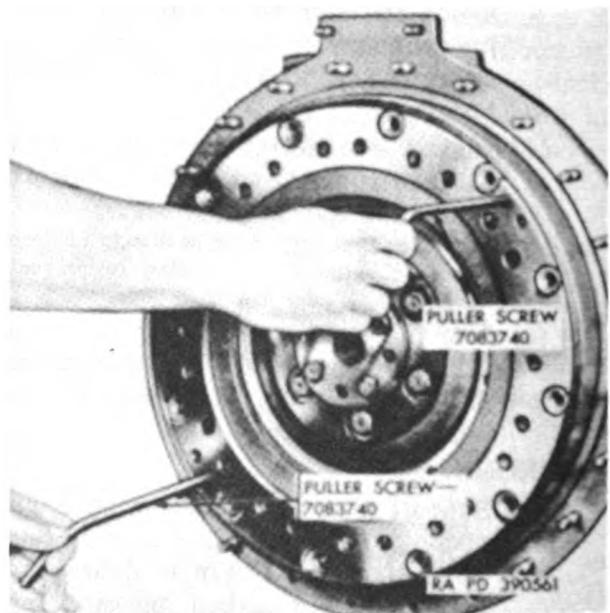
Removing flywheel cover plate (model AOSI-895-5M engines only).
